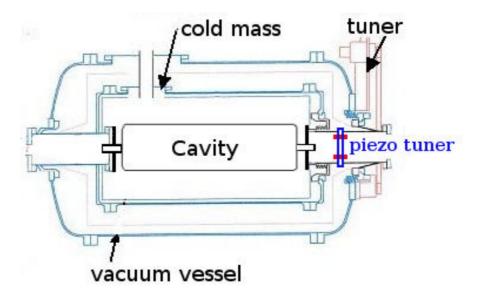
Cross sectional view of the cryostat showing the position of piezo tuner and mechanical tuner
